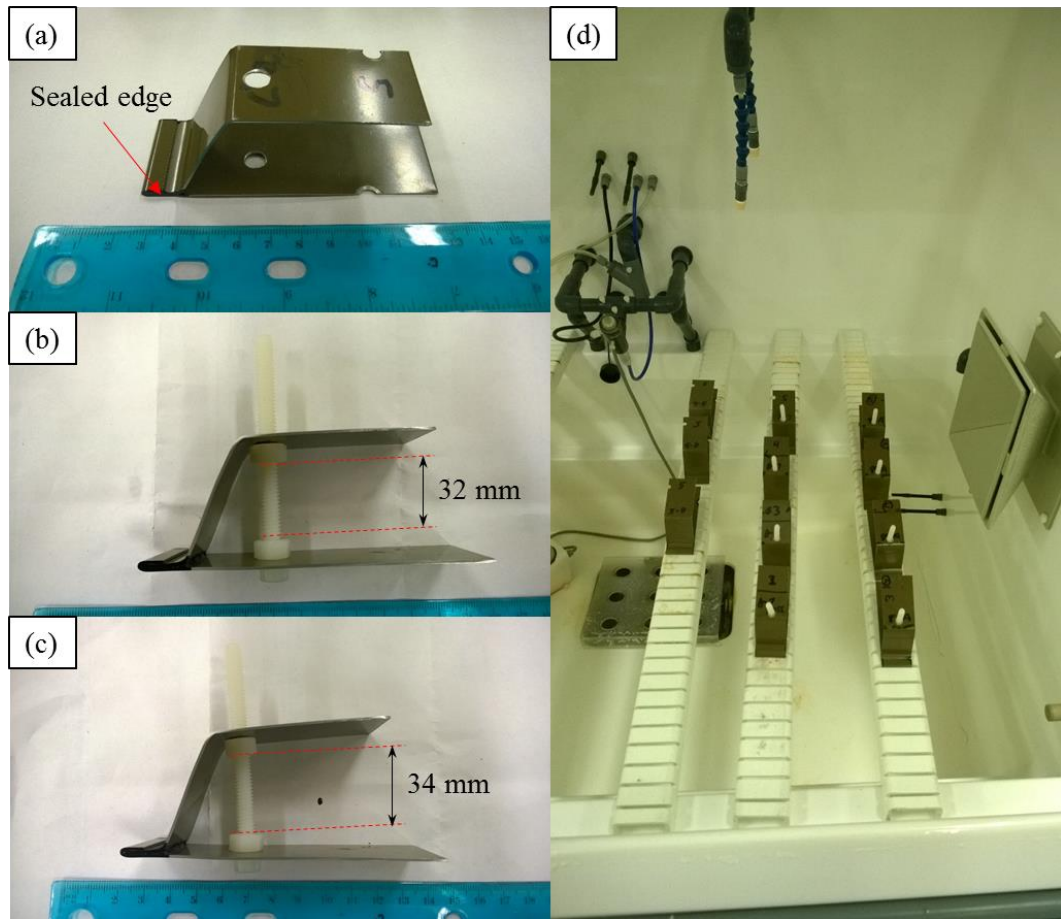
Photograph of (a) a hem flange coupon with two holes drilled, (b) a hem flange coupon at neutral position with a plastic bolt placed through the holes, (c) a hem flange coupon held at +2 mm position, and (d) the layout within the chamber.
